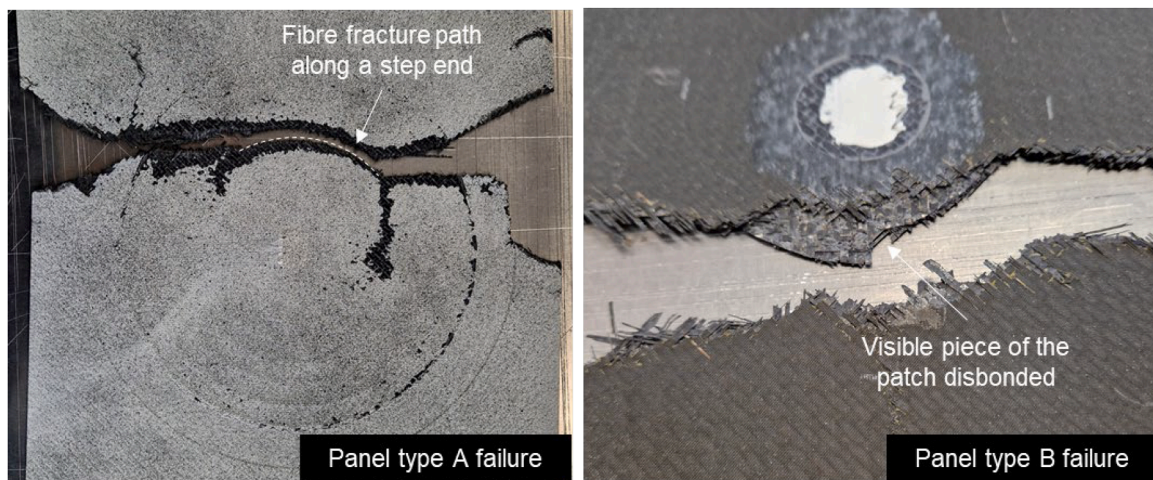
Macroscopic view of the fracture morphology of stepped repaired panels.
